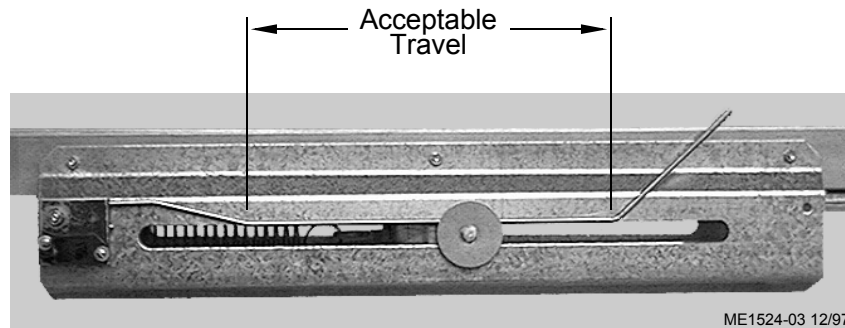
Take-Up Belt Assembly—Acceptable Belt Travel (Left Hand/inside view).
